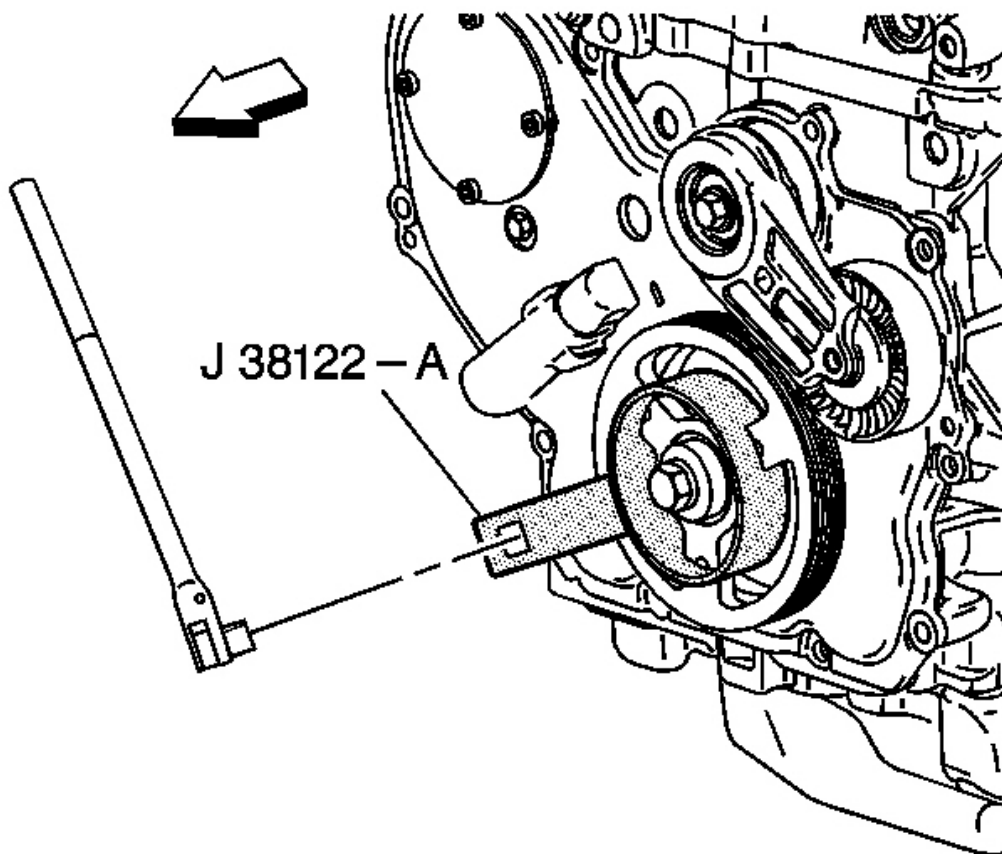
View Of Harmonic Balancer Holder J38122-A
